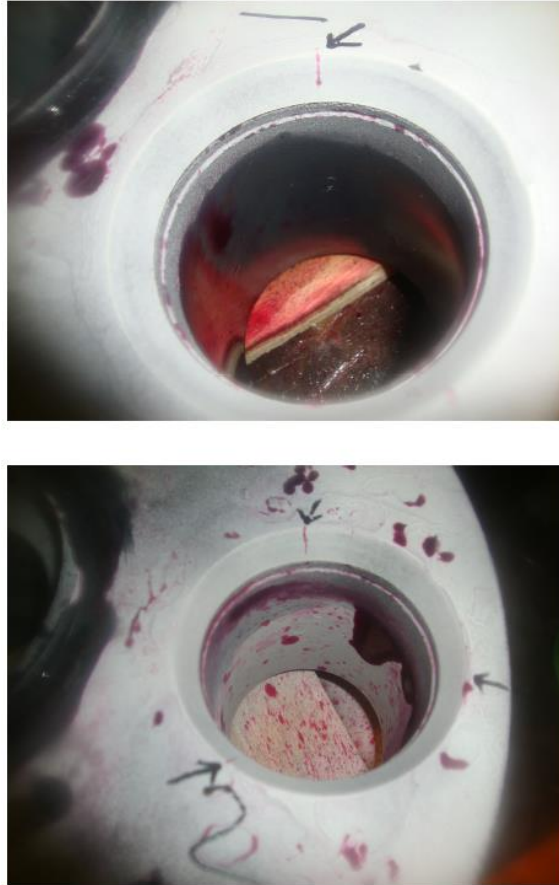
Cracks in Unit 2 Main Stop Valve Bypass Seats Revealed Through Dye Penetrant Inspection
